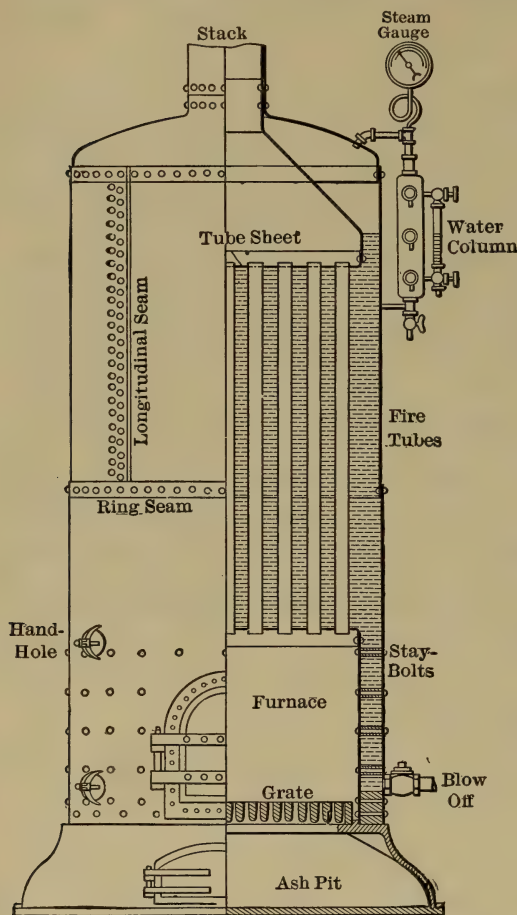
Vertical Tubular Boiler with Submerged Tube Sheet.
